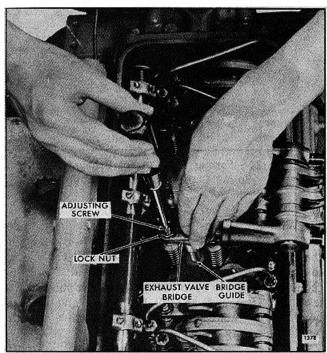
Valve Bridge Adjustment (Four-Valve Cylinder Head)
